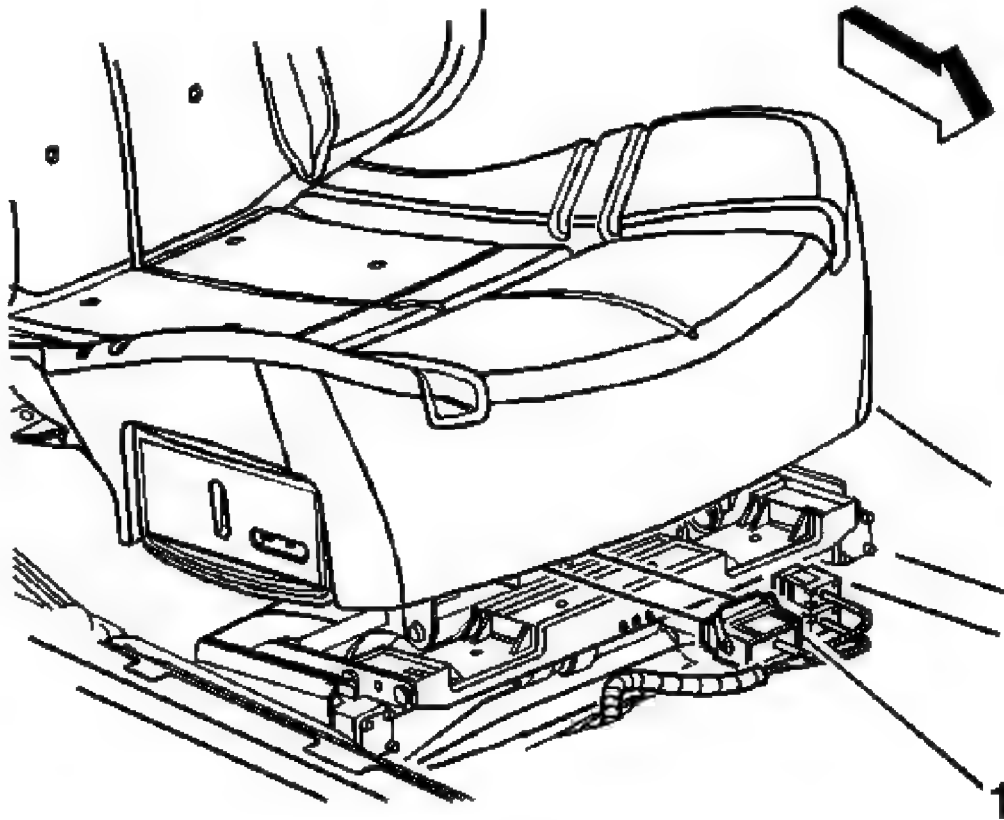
Locating Side Impact Module & Pretensioner Yellow Connector
